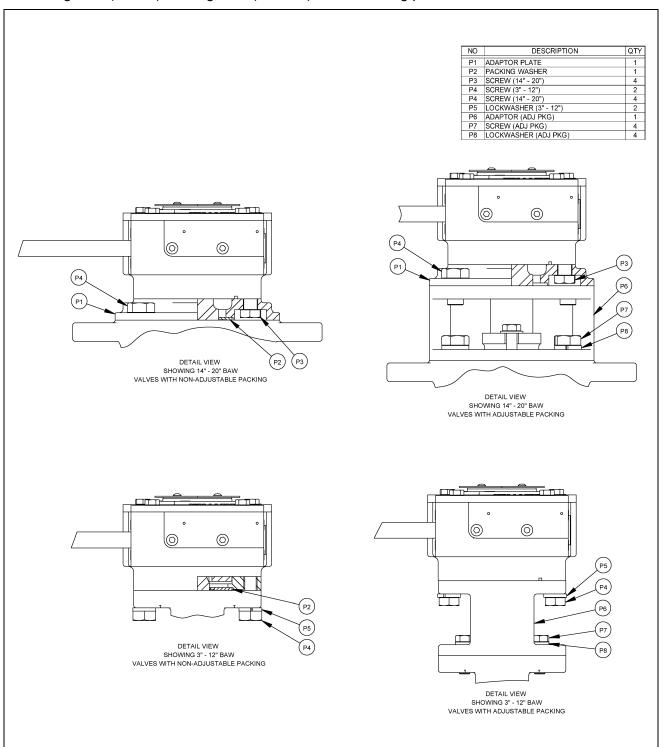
G_-6B Connecting Parts Identification 3" – 20" Valves
